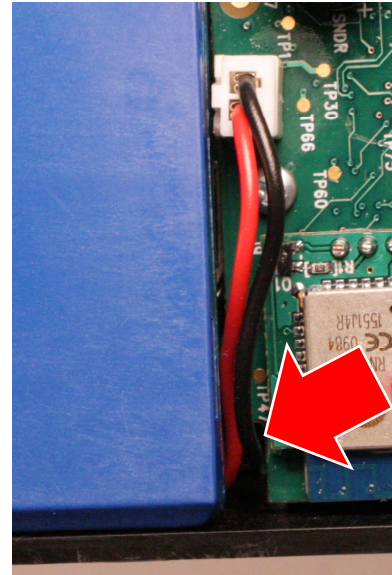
B: BE SURE WIRES ARE ROUTED THROUGH PCB OPENING (ARROW). *Do NOT pinch wires!
